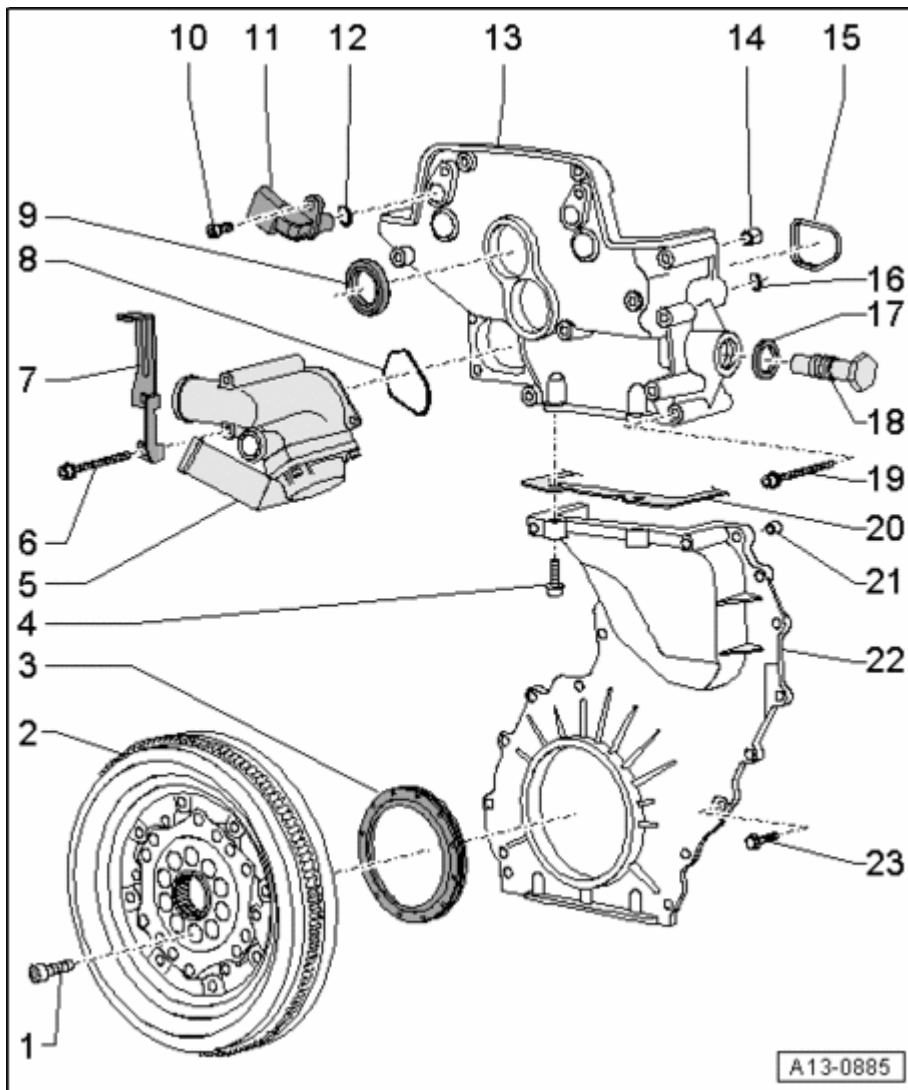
Timing Chain Covers & Dual Mass Flywheel, Assembly Overview
